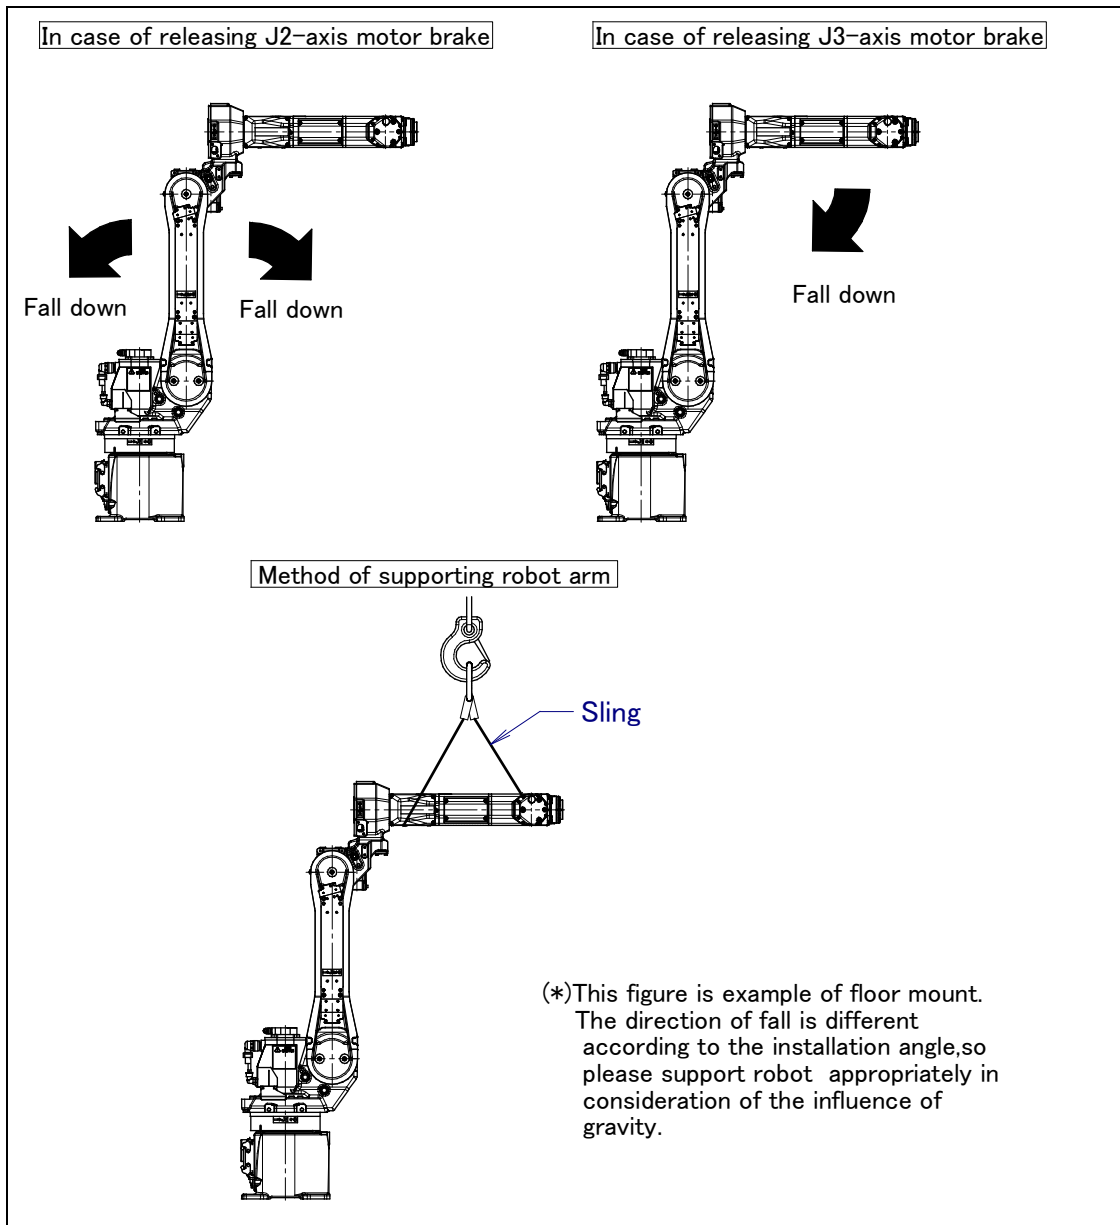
(a) Releasing J2 and J3 motor brake and measures
